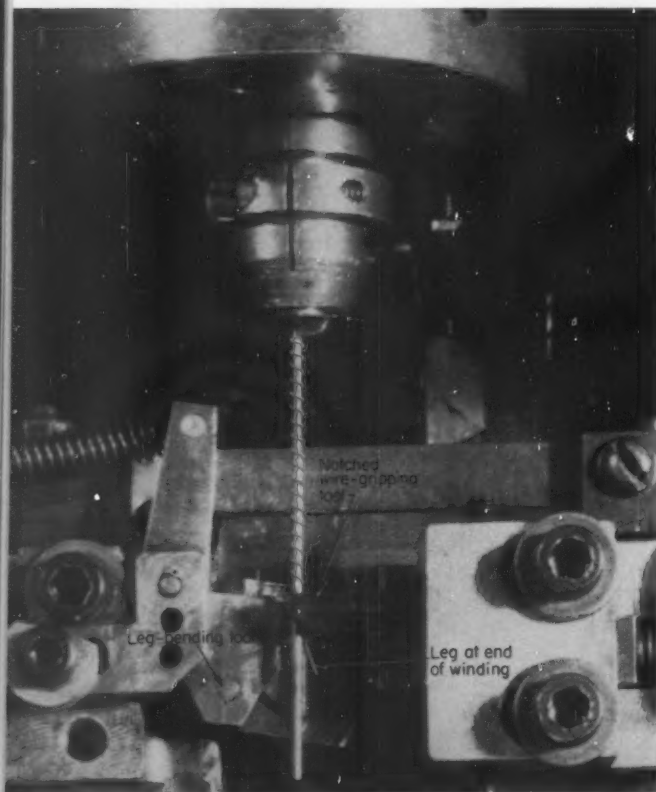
Head of heater-spacer coil-winding machine. Pictures show why tails on coils were not consistently formed at the same angle. Camera speed—1200 frames per sec; lens—102-mm, f:4.5; lighting—four 750-w photo-flood lamps; distance, lens to subject—12 in.
